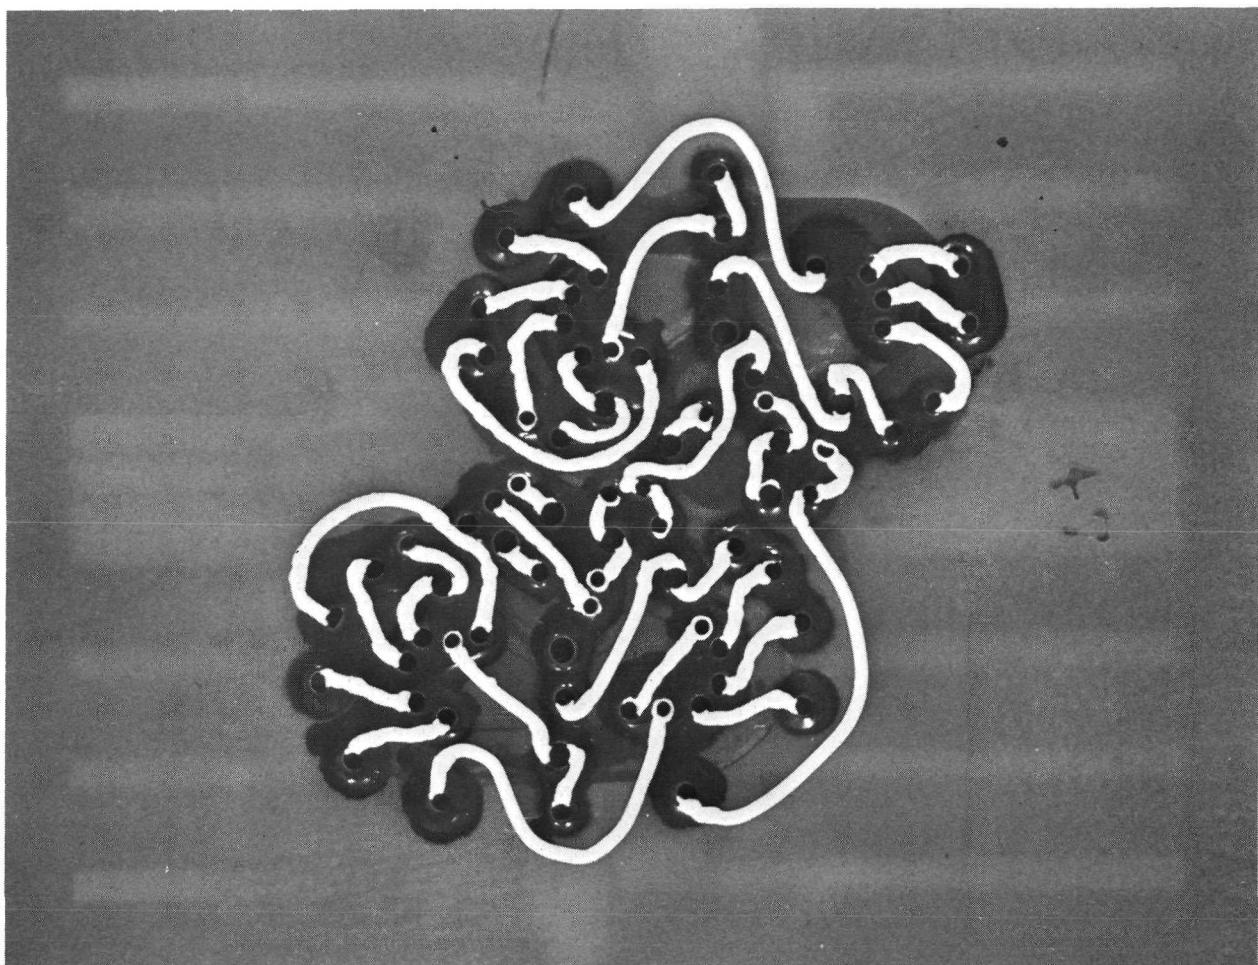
Photograph of Single Stage Circuit With Plated Drive Conductors: Bottom View
